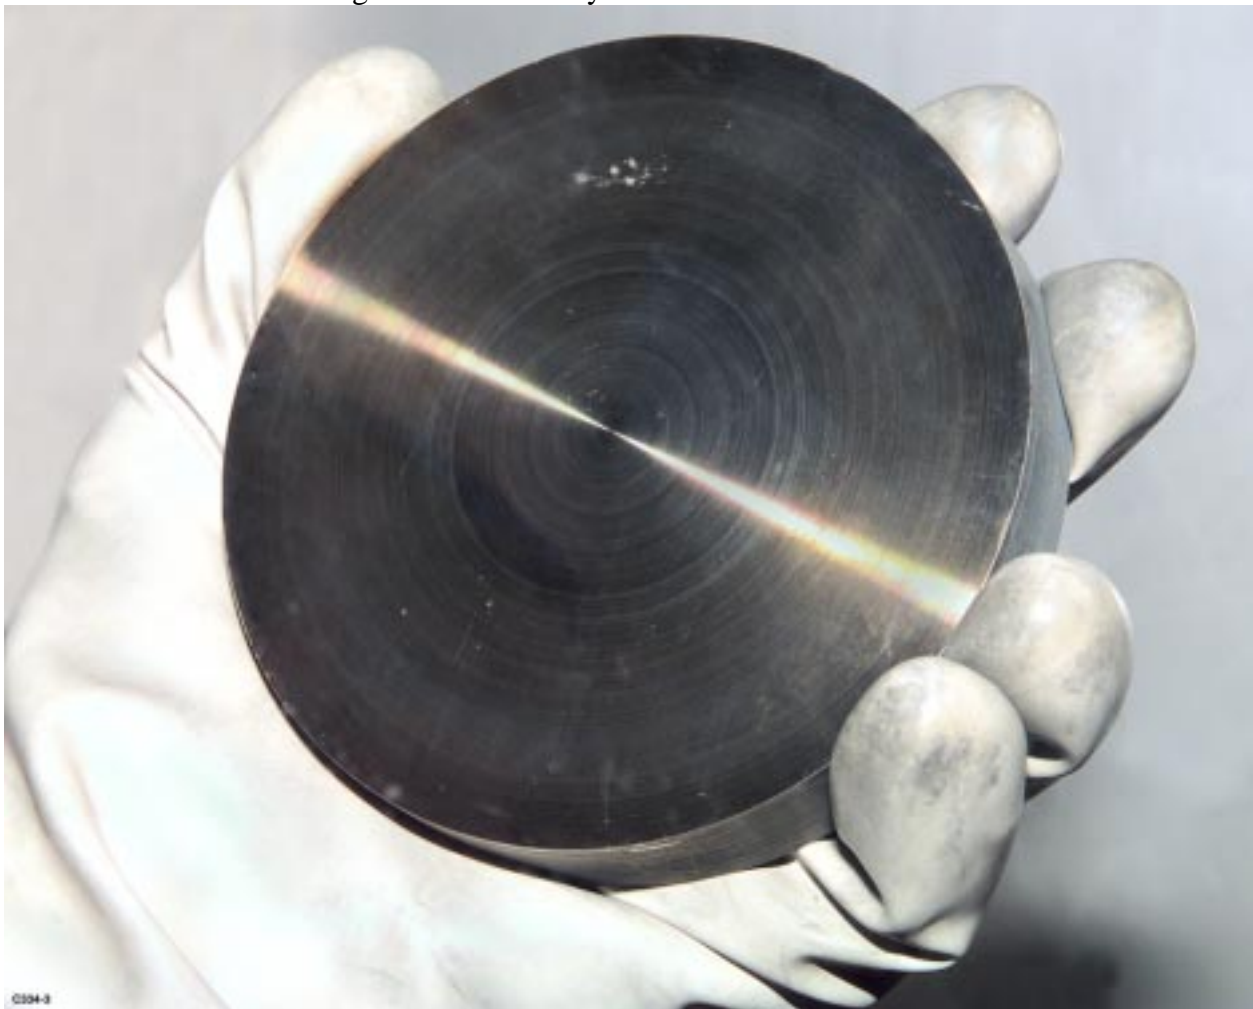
Machined α -Pu ingot (4.358" diameter, 0.751" thick).
